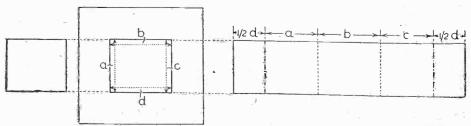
The insulating material for the bobbin should be marked out as shown above.
